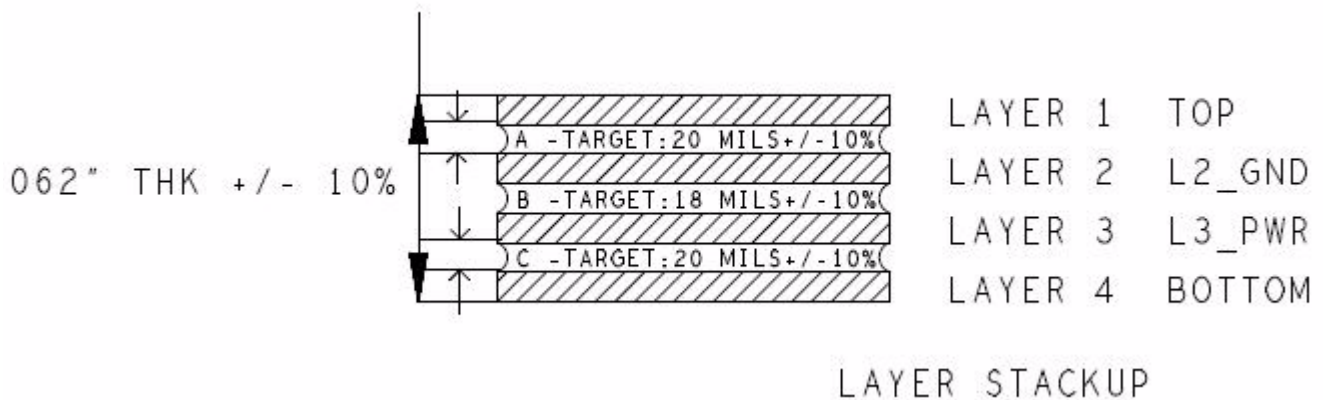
TWR-KW2x PCB Stackup Cross-Section (Four Layer)
